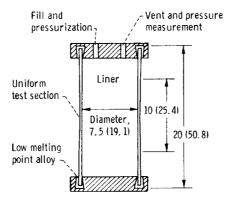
Schematic diagram of biaxial cylinder with removable end caps used for cyclic tests. (Dimensions are in inches (cm).)
